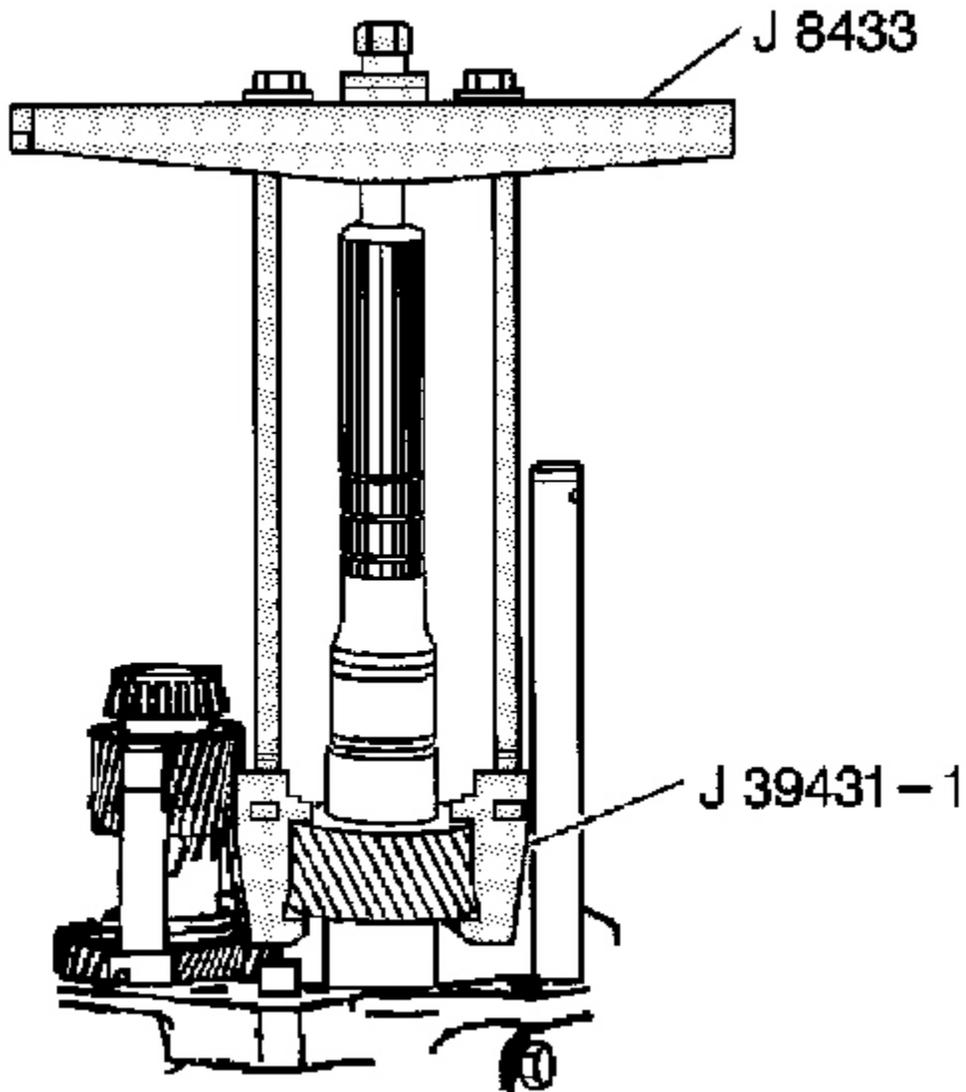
Removing 5th/6th Speed Driven Gear Using J 8433 & J 39431-1
